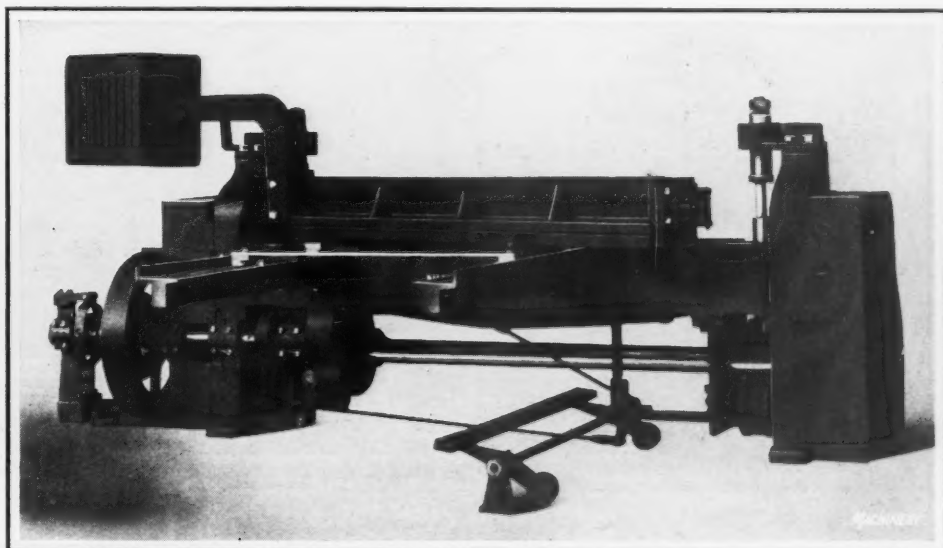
Niagara 72-inch Power Folder and Brake for Sheet Metal up to No. 14 Gage
